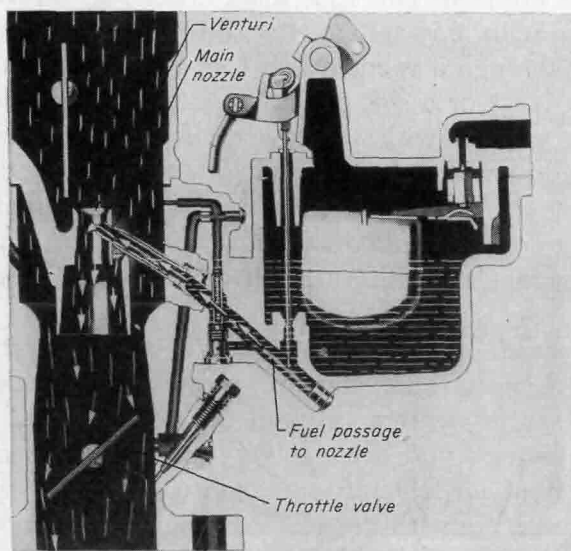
High-speed circuit in carburetor. Throttle valve is fairly well open, and gasoline is being fed through high-speed nozzle. Lines indicate air; arrows indicate gasoline. (Chevrolet Motor Division of General Motors Corporation)
